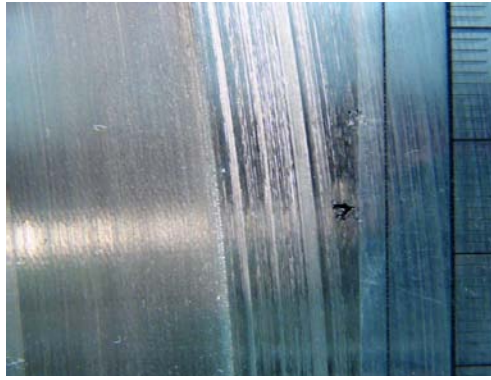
A Photo of Wear on Rotating Part, it Can Be Seen a Defect in Metal
